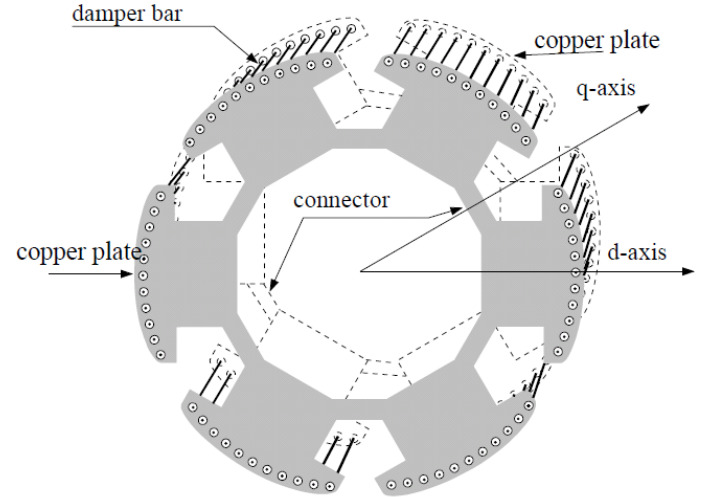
Example of a classical damper winding for a 6 pole salient pole machine [15].
